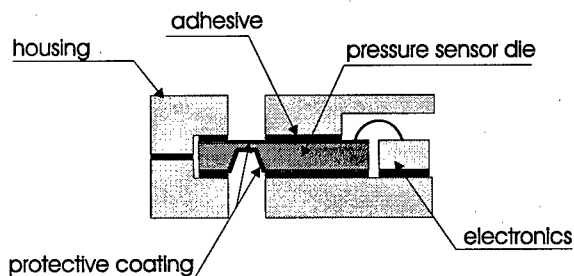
Cross-sectional drawing of a differential pressure sensor directly exposed to the media. The sensor chip is coated at both sides and mounted in a housing using adhesives.
